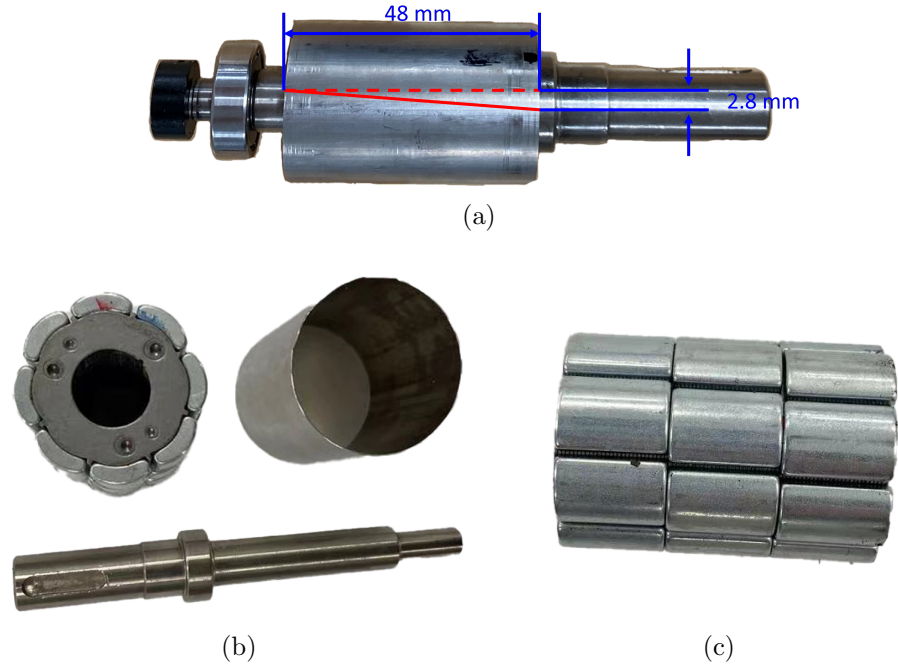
Rotor skew and material analysis, (a) rotor magnet skew angle measurement, (b) sleeve disassembled from rotor and shaft, and (c) side view of rotor magnet alignment.
